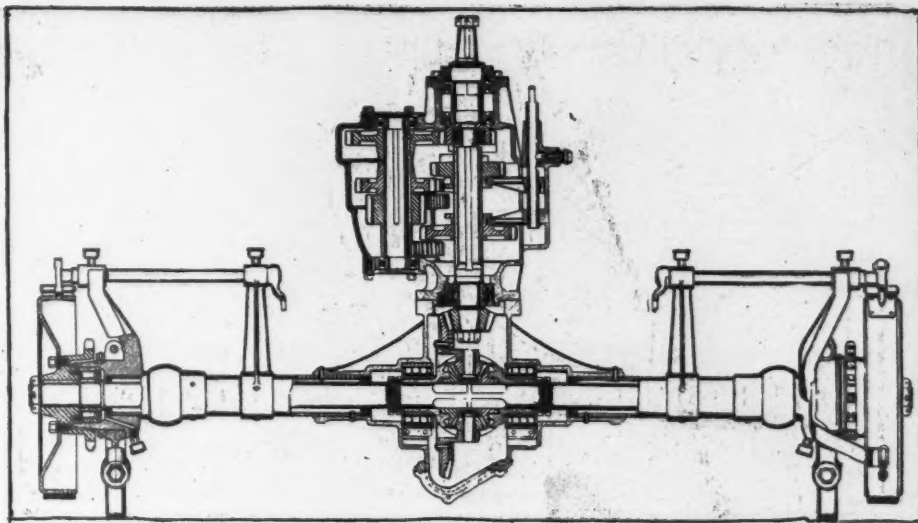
WARNER MFG. CO.'S COMBINED GEARSET AND JACKSHAFT
